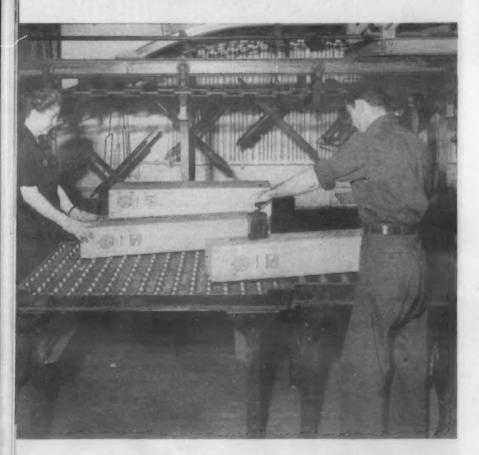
The clean outer tube assemblies and burster charge well assemblies are packed in shipping containers ready for loading at another plant. Boxes after sealing and marking are slid on to a conveyor which takes them down to the railroad loading platform.
